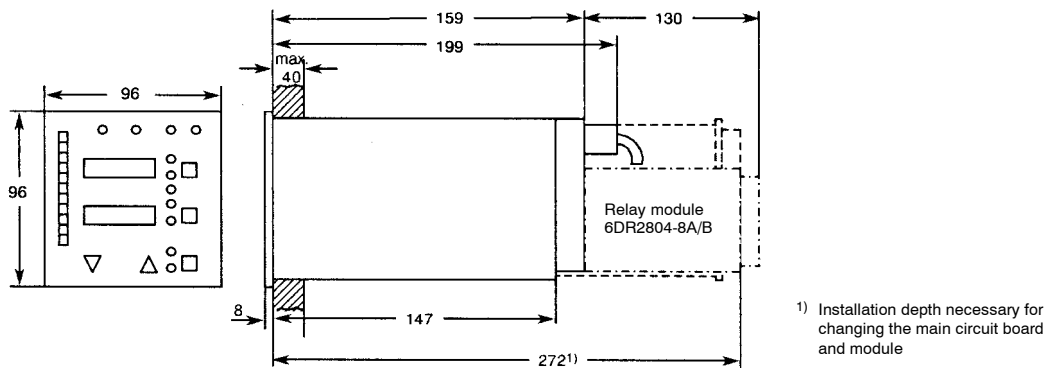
Dimensions SIPART DR19, dimensions in mm
